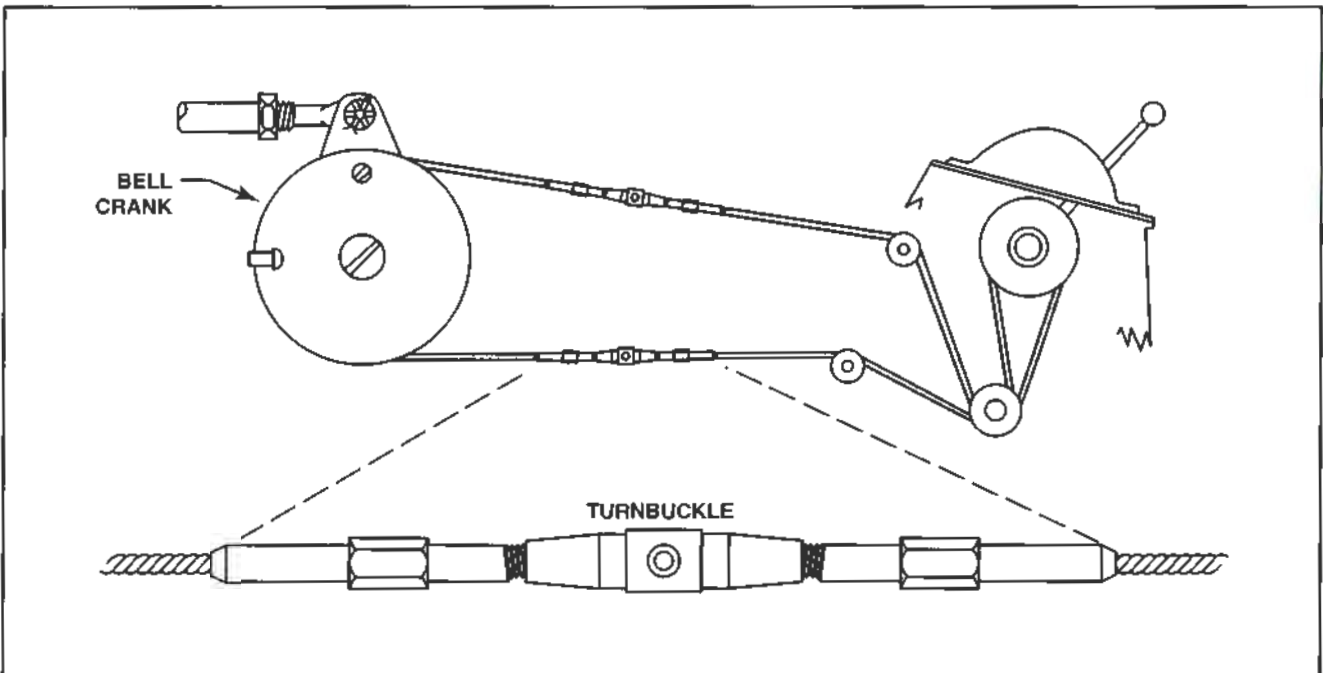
Some control systems consist of a cable and pulley arrangement to actuate engine controls. With this style of system, the cable assembly may have to be separated at a turnbuckle in order to remove the control rod.
